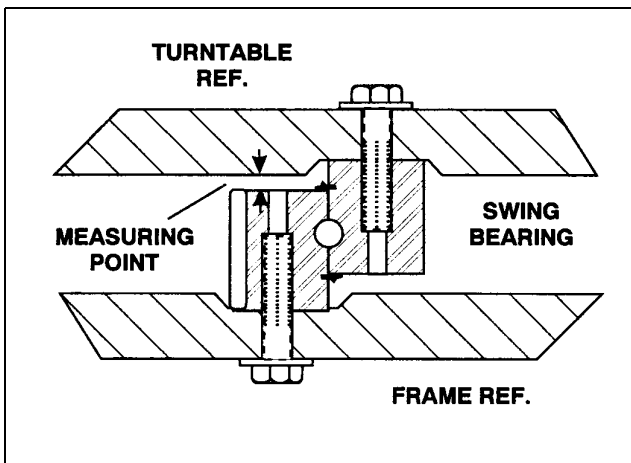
Swing Bearing Tolerance Measuring Point.
